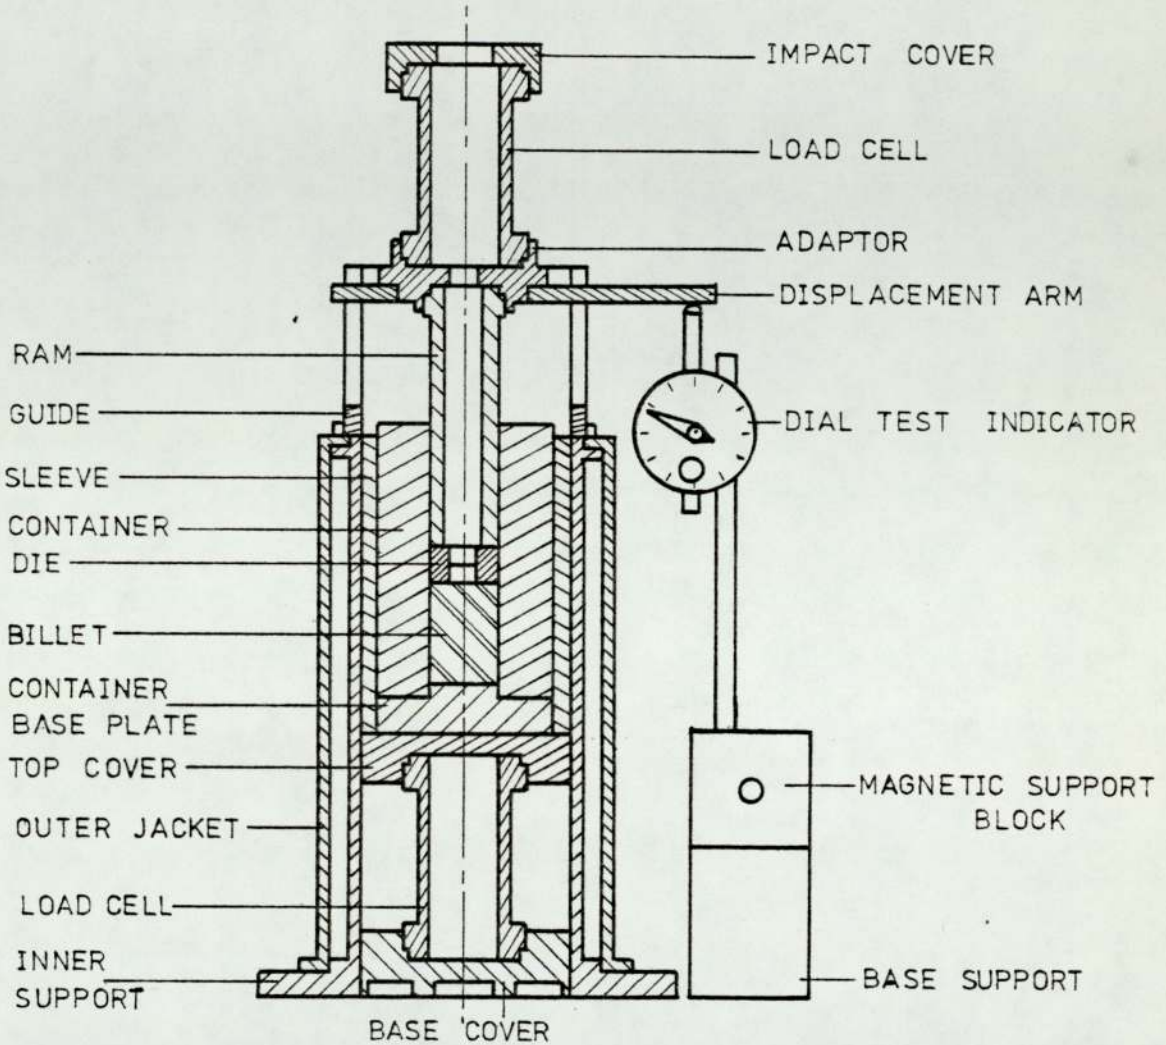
POSITION OF DIAL TEST INDICATOR FOR THE IMPACT EXTRUSION TESTS.
